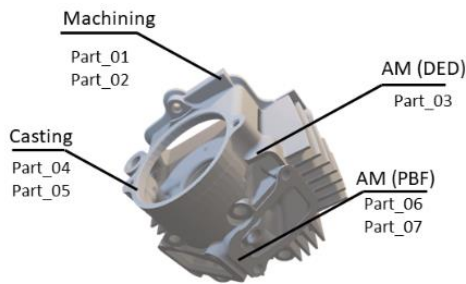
Exemplary product assembly with parts from multiple manufacturing techniques
